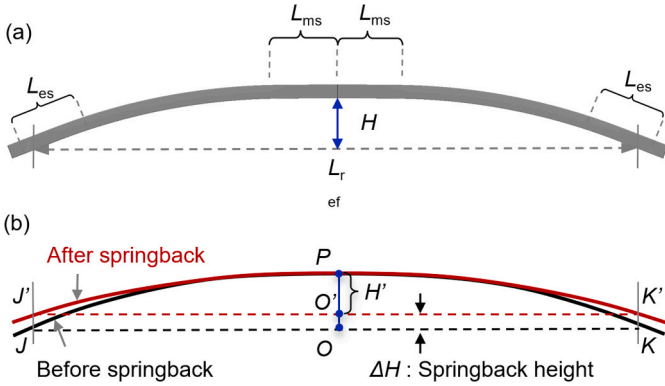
Springback of stretch bending: (a) before unloading; (b) definition of springback.
